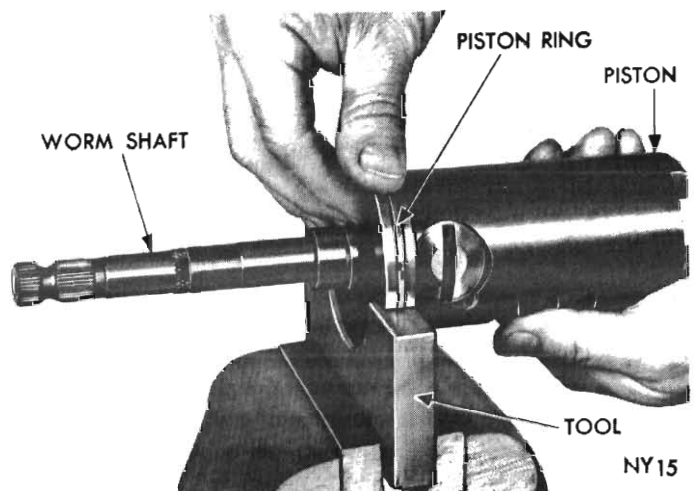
Removing and installing piston ring (Tool lever not shown)
